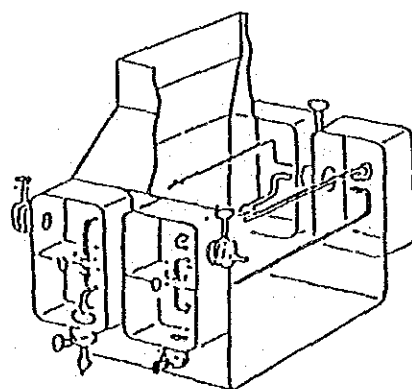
Condenser Back-wash Valve Drawing (Contained Type)
